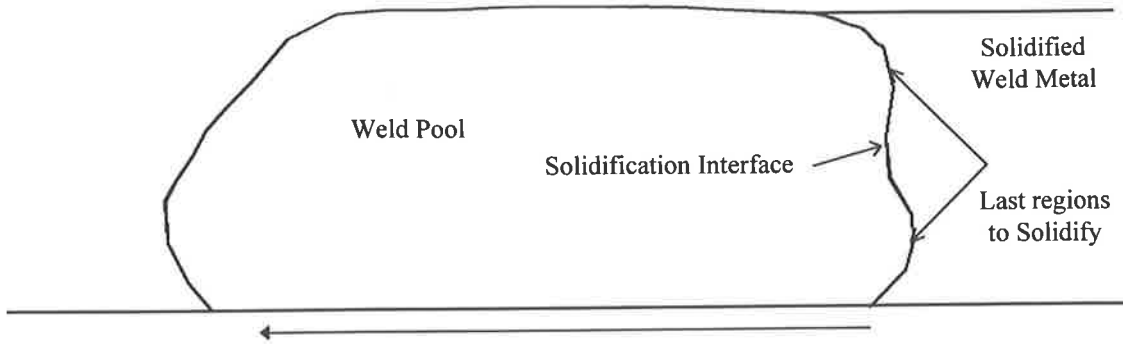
Schematic of a longitudinal vertical section of a weld pool showing two maxima, representing the two last regions to solidify, at the solidification interface (back end of the pool). The arrow indicates the indication of welding.
